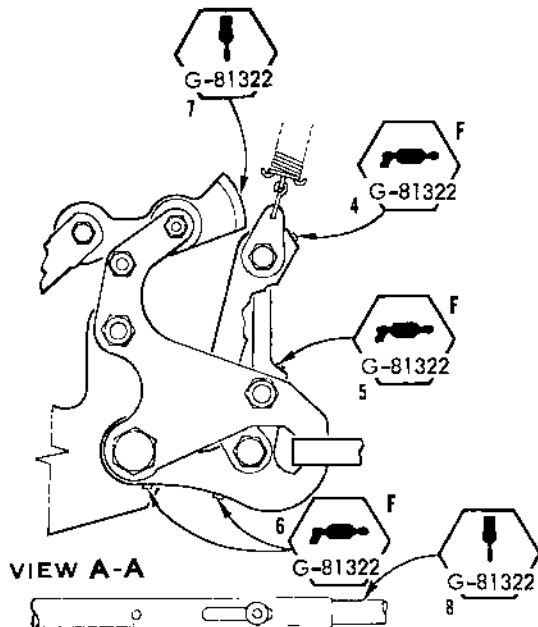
Main Landing Gear Doors and Uplatch Mechanism Lubrication (Sheet 2 of 2)
